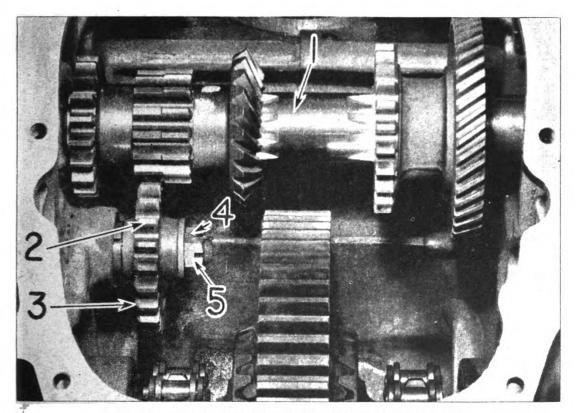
First Reduction Shaft and Reverse Idler Gear
